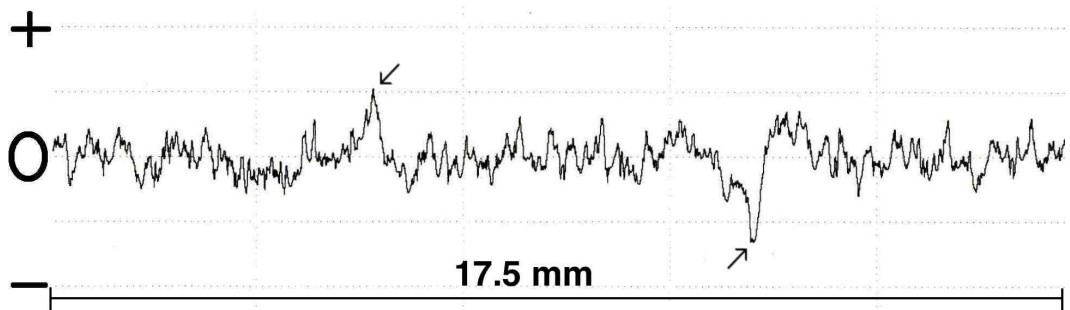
Surface profile of AA6082.50-T6 welded + SP.
